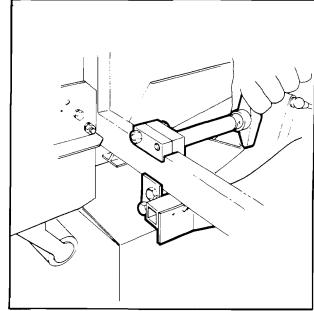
BOX POSITION II SIDE DRIVE BELTS
